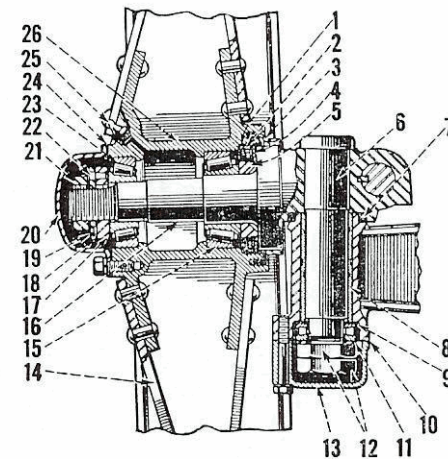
Model W40 steering knuckle. Models F20, F30 and W30 are similar.
